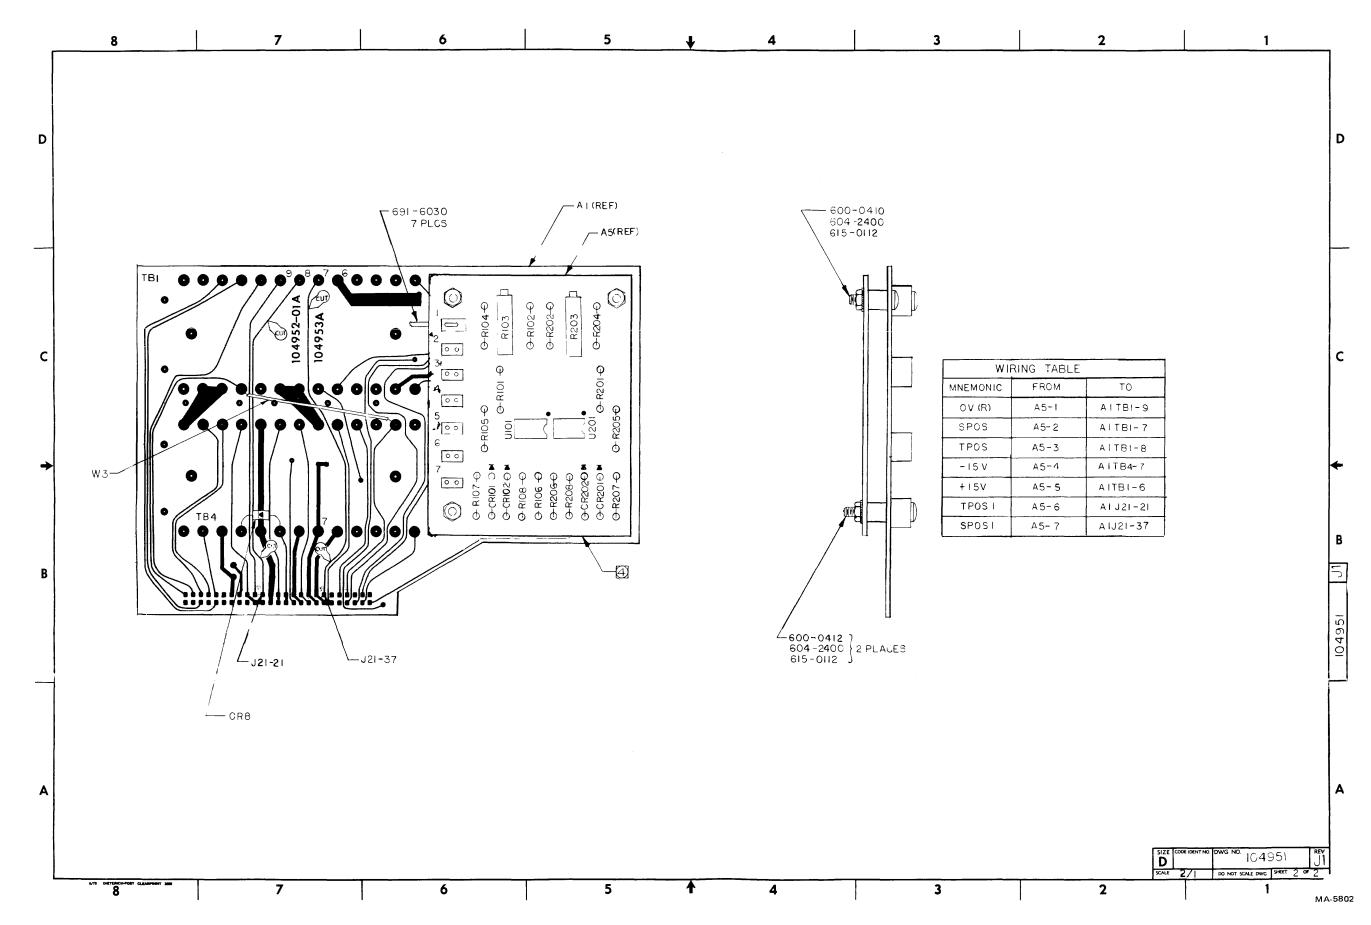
PCBA, Interconnect F (Sheet 2 of 2)
